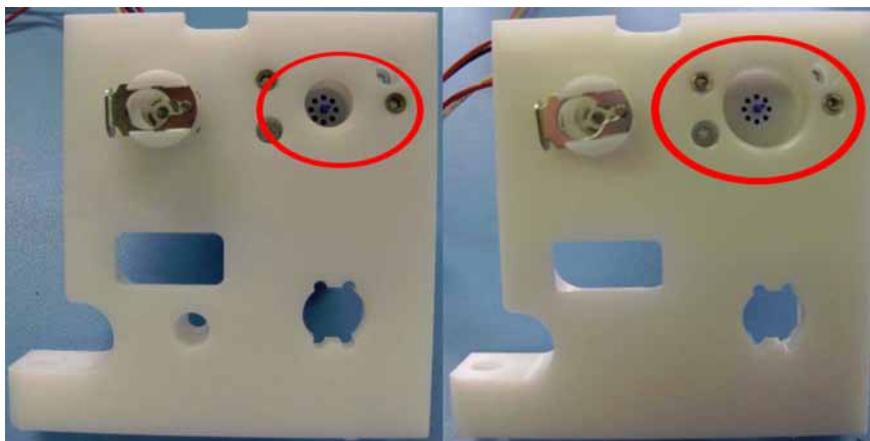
Mounting plate Rev 00 (left) and Rev 01 (right)
